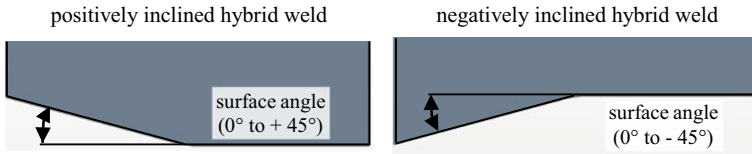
Sketch of the geometric shape of the investigated hybrid weld contour
